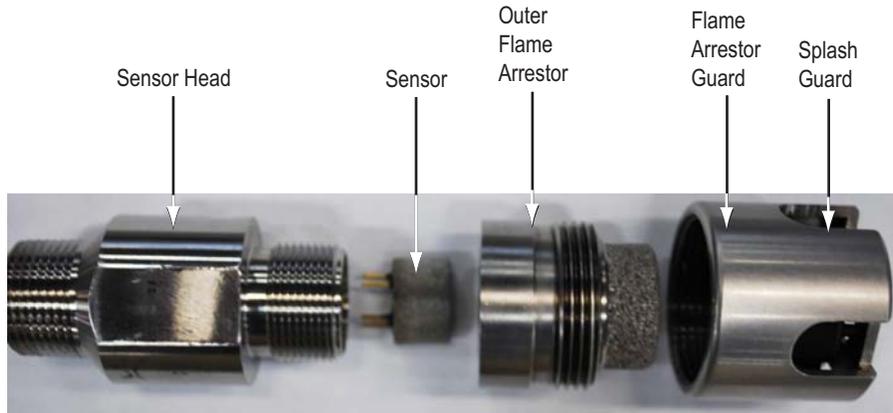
shows the Combustible Sensor Assembly that is ATEX approved. Note, that any Sensor may be used.
